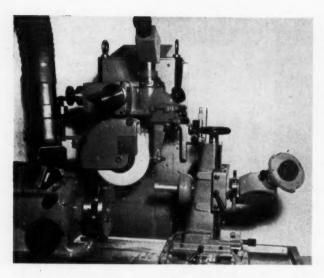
The "Precision Grinding" Wheel Dressing Attachment is Here Shown Mounted on the Wheelhead of a Jones & Shipman No. 1400 Surface Grinder
